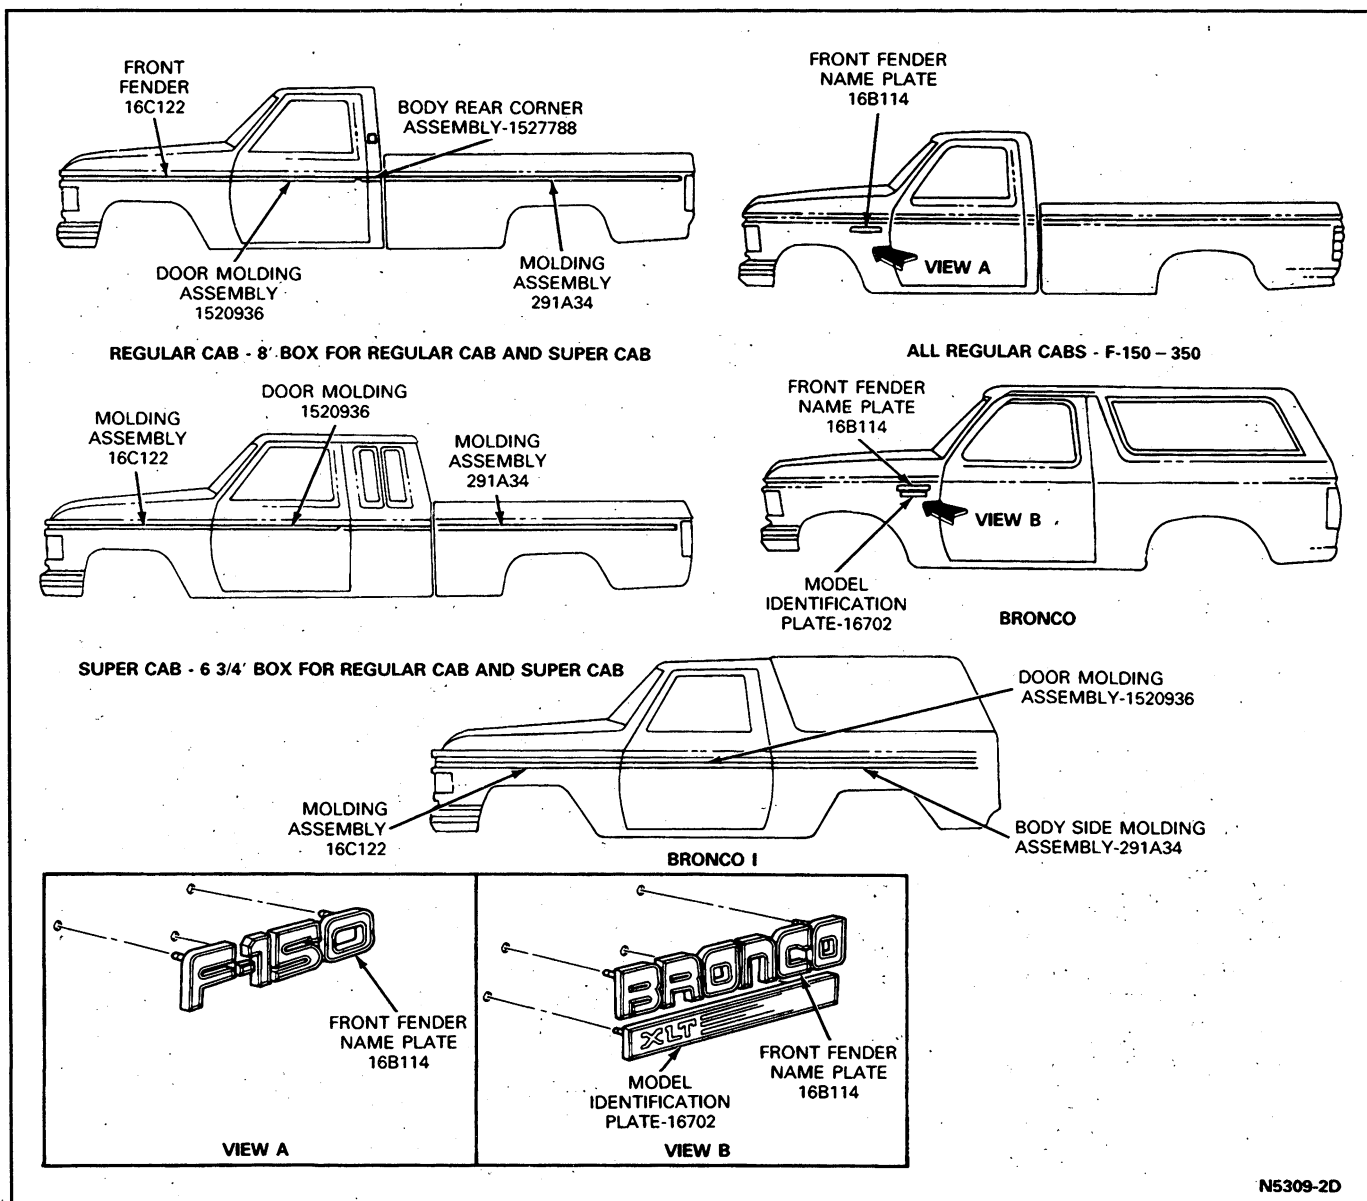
Exterior Ornamentation, Body Side Mouldings with Tu-Tone Paint Only—F-150—F-350, Bronco
